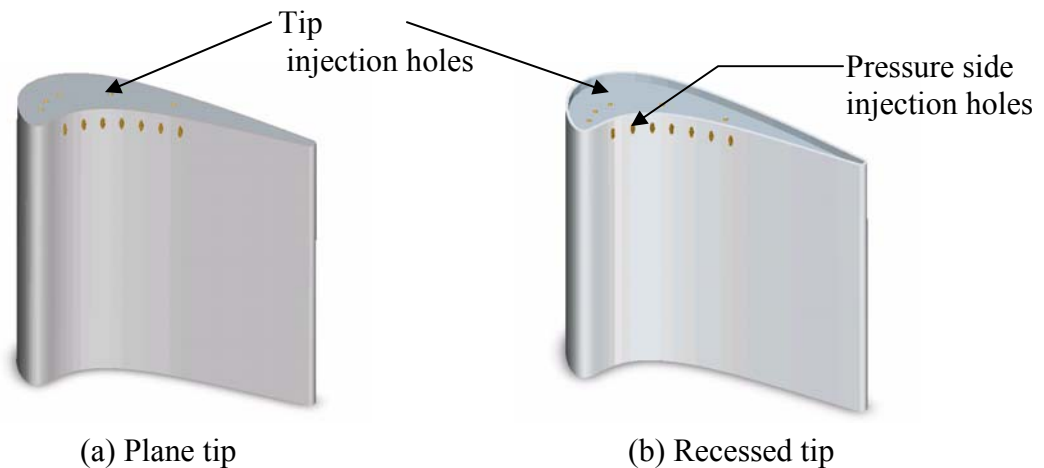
Plane and recessed tip blade with tip and pressure side coolant injection holes
